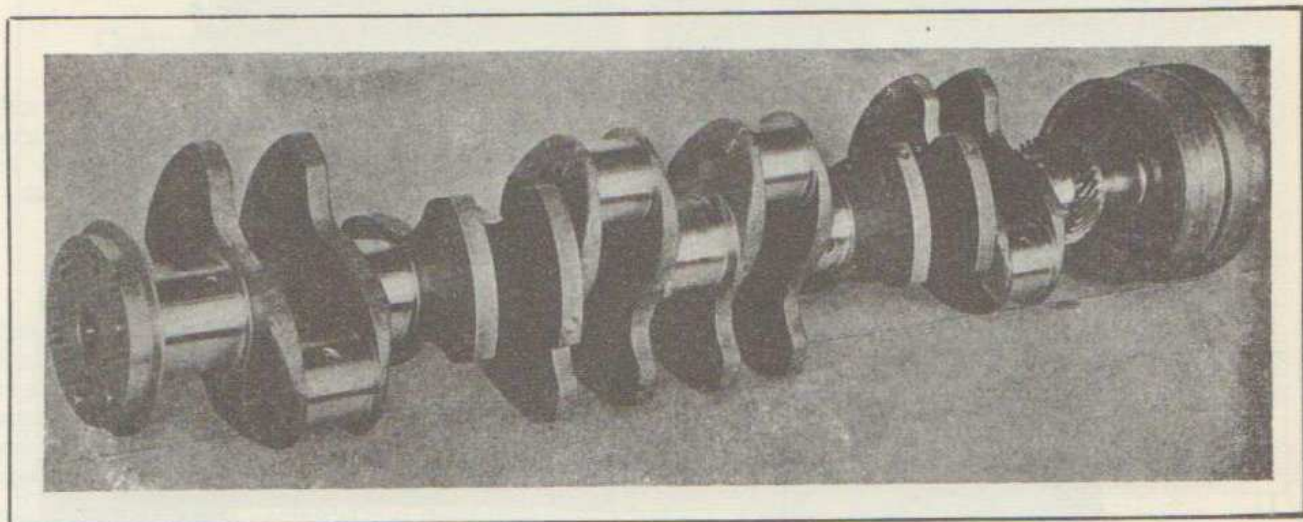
View of Crankshaft, Showing Hollow Crankpins, Integral Counterweights and Vibration Damper
